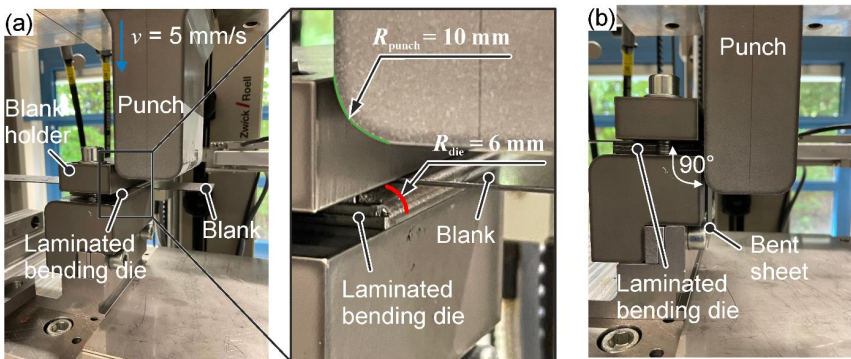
(a) Test setup for air bending, (b) bent sheet during and after bending
